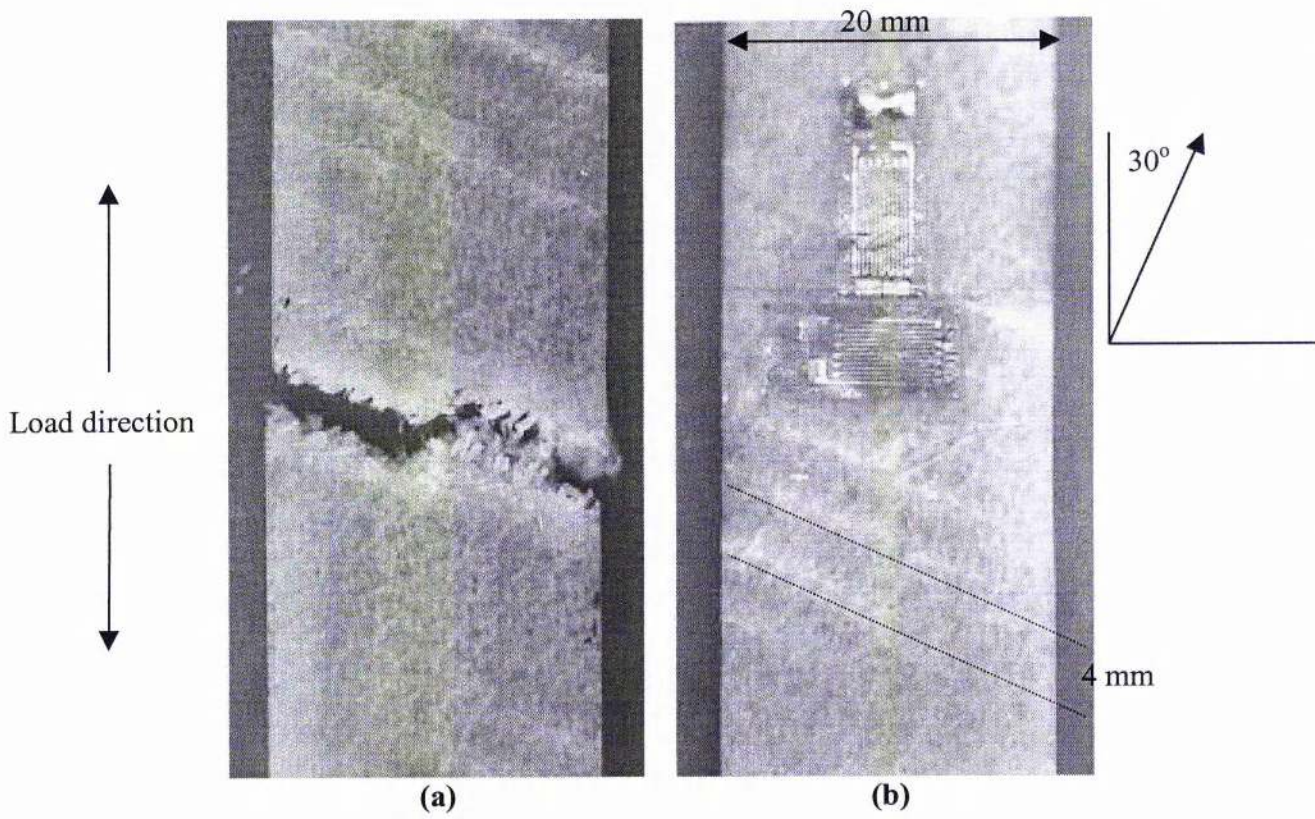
Fracture sample tested in the 30° direction . (a) Fracture area
